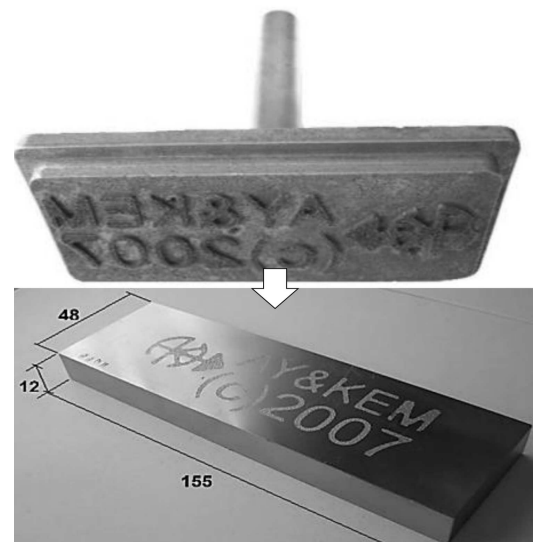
Electrode (top) and machined SAE 1040 steel part (bottom) produced from a C/P composite in EDM [22].
